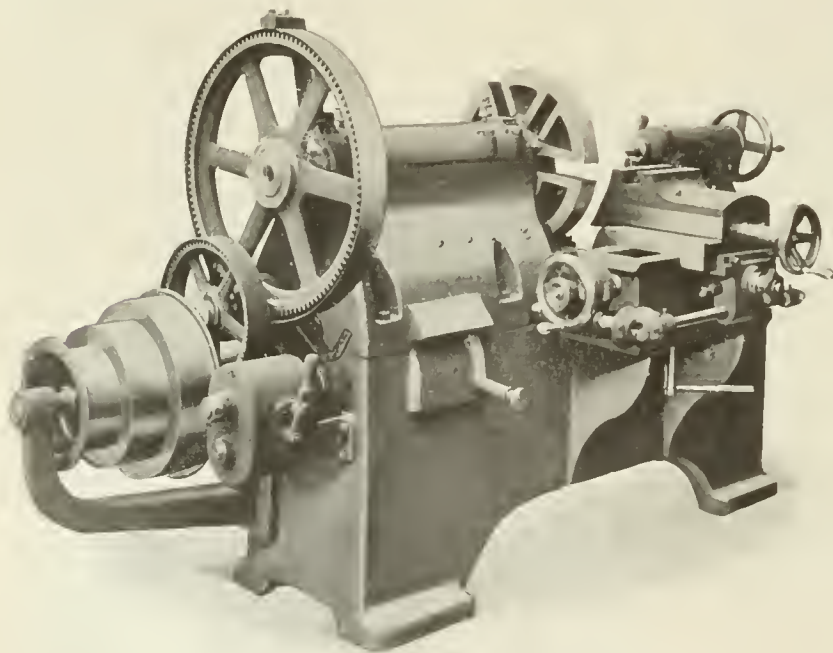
Pulley Lathe, built by the Cincinnati Pulley Machinery Co.
